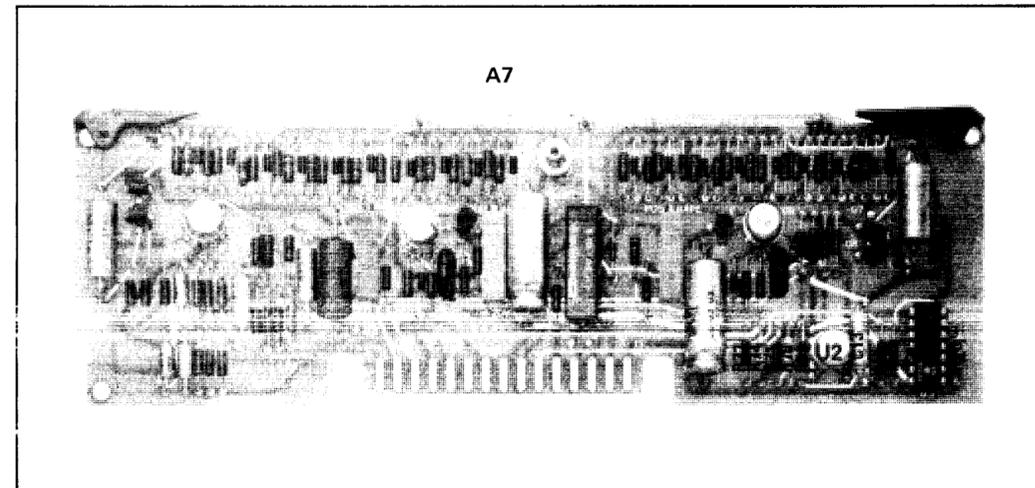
P/O A7 FM Shaping Assembly Component Locations
